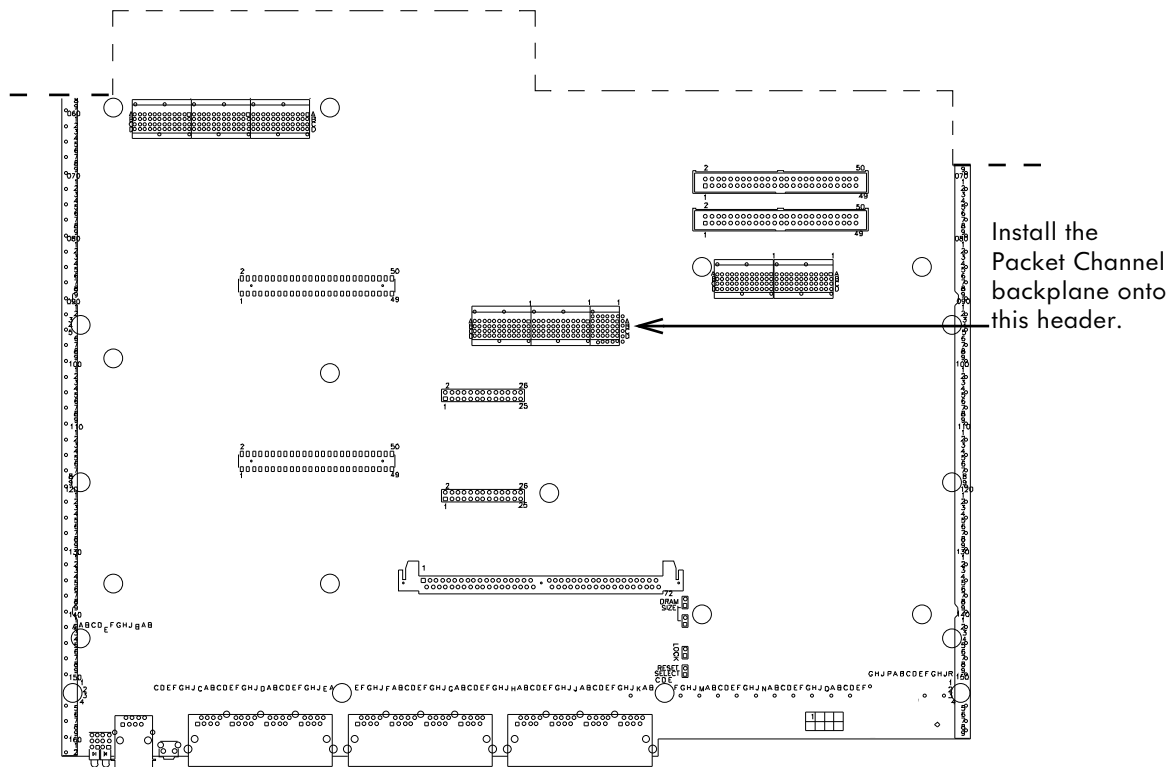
Where the Packet Channel backplane is attached to the Packet Engine.
